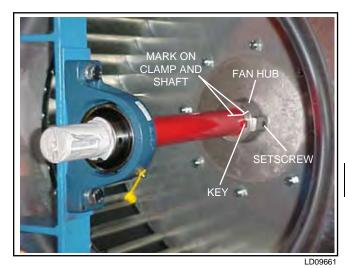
FC FAN SHAFT AND WHEEL MARKING
